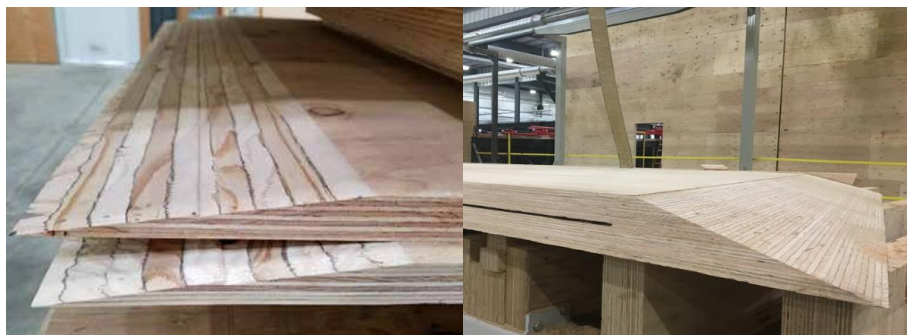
Edges shaped using the “Scarf” (beveled edge) joining technique (Freres Engineered Wood, 2023).
